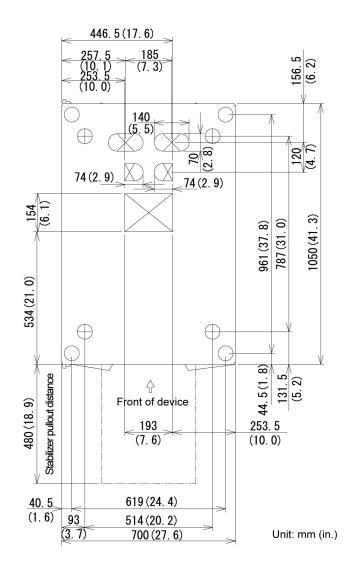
Bottom view drawing of the (slim) 19-inch rack
